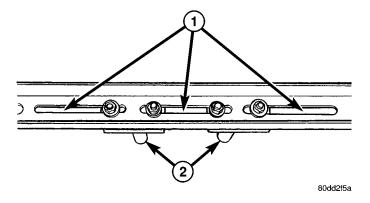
Positioning Special Tool 6848 for use with Adapters 8444 & 6912
